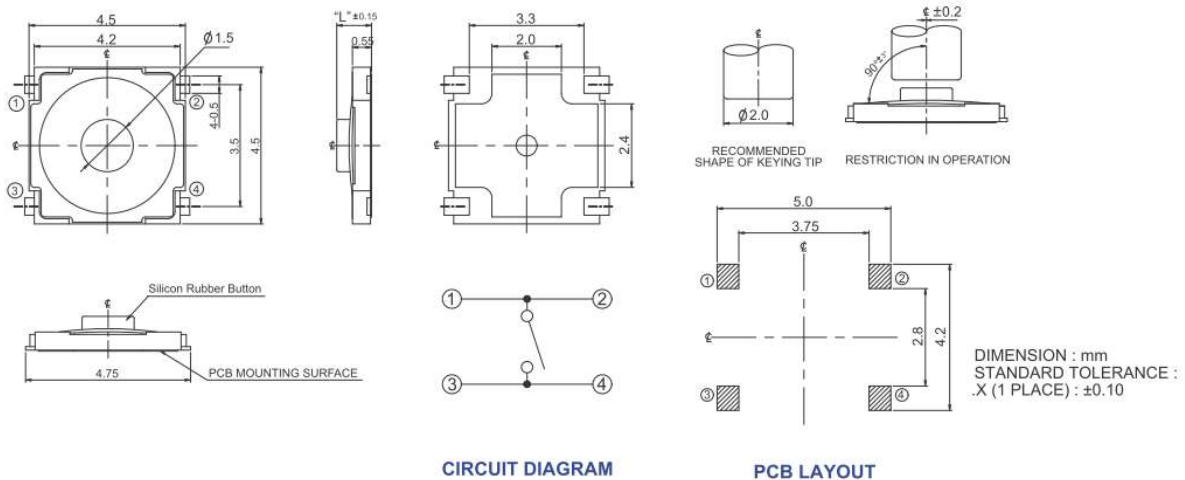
223BM2VB..., Surface Mount Gull Wing Type 2, With Button
